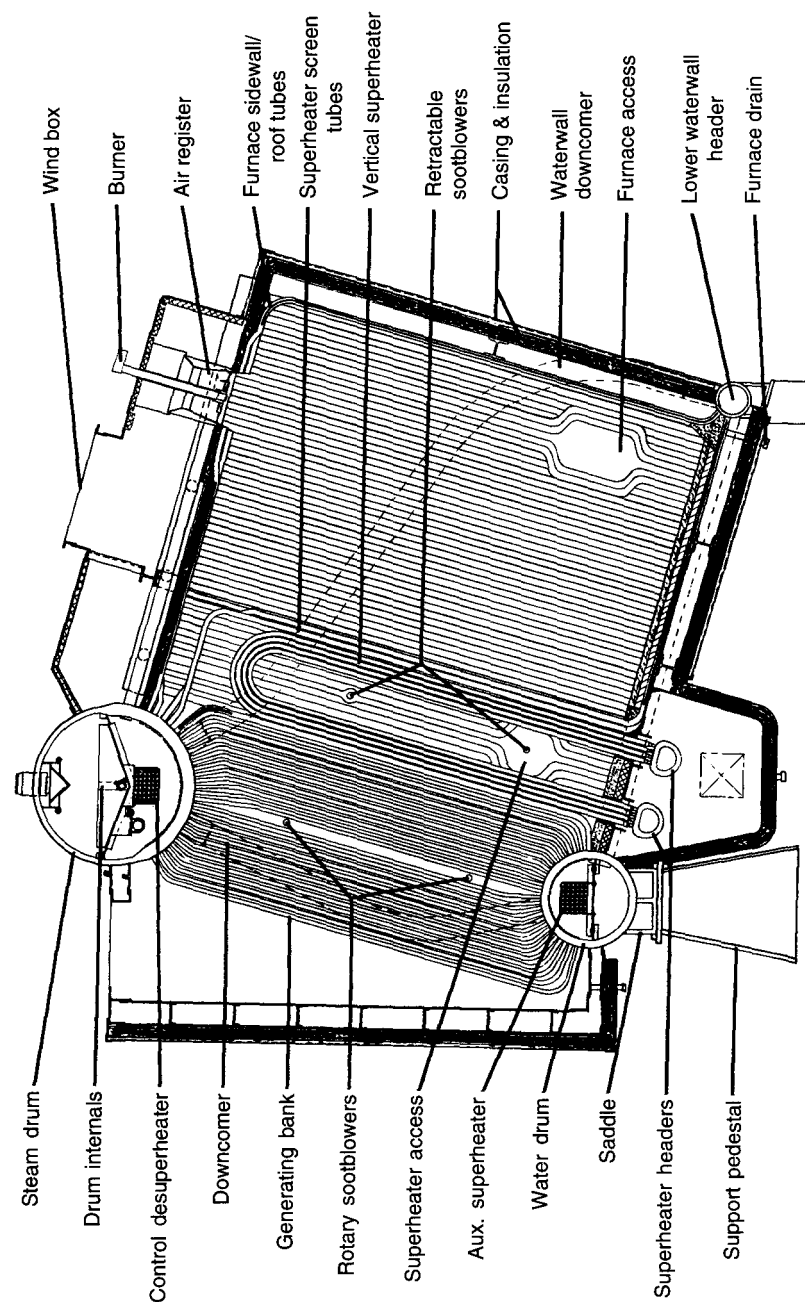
CE V2M-8 boiler. Reprinted with the permission of Combustion Engineering, Inc.
